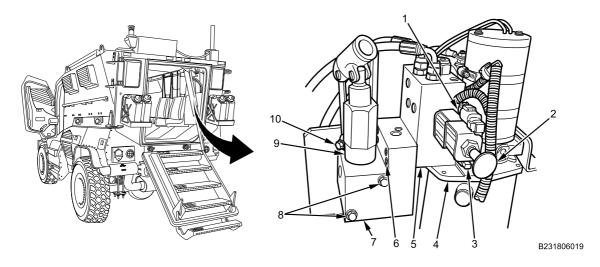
Hydraulic Power Unit Manifold and Module Removal.
